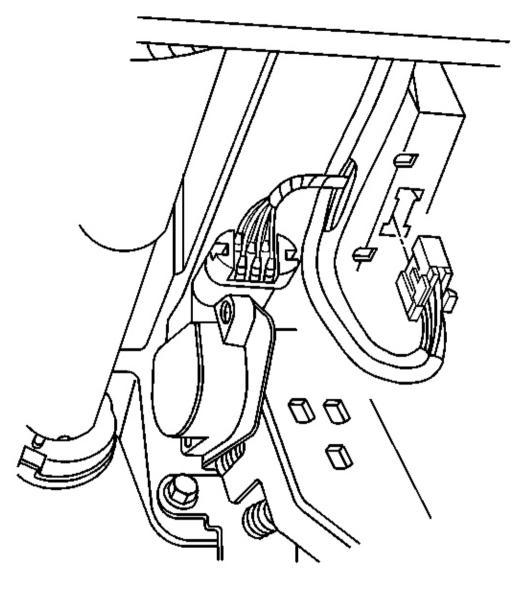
Electrical/Audio Connector At Bose(R) Signal Processing Module Courtesy of GENERAL MOTORS CORP.
